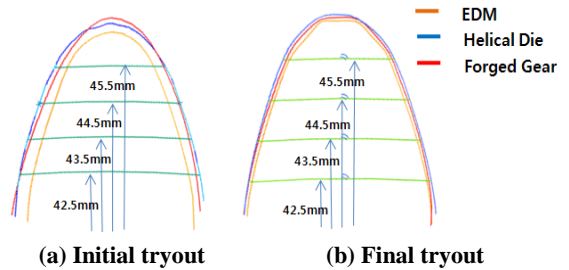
Gear tooth profiles obtained by 3 dimensional gear measurements
